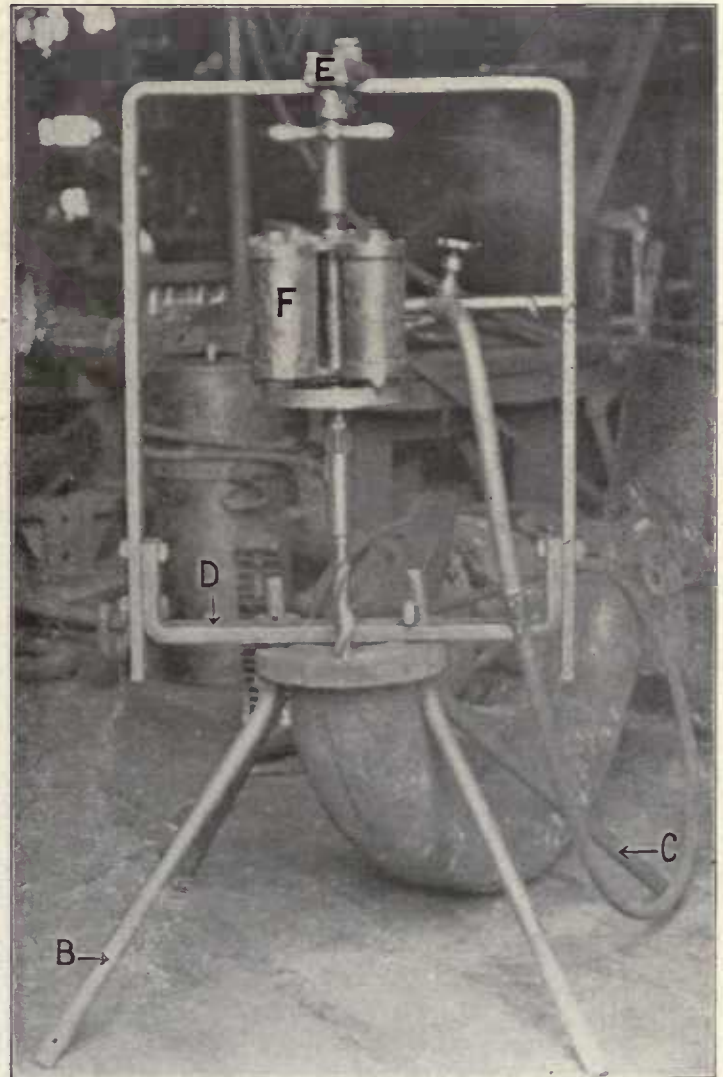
Drilling Holes in Steam Pipe Flanges.
